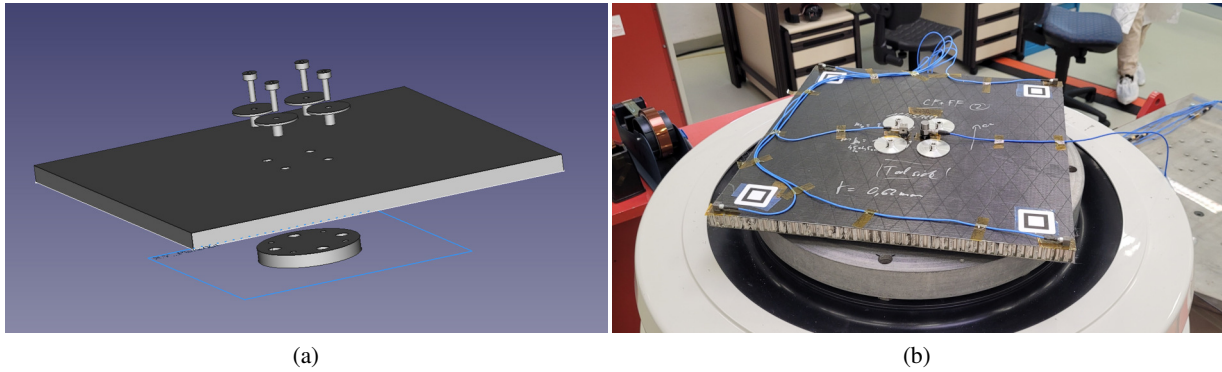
Sandwich panel vibration test (a) exploded view of the sandwich panel assembly Computer-Aided Design (CAD) 3D model, and (b) final testing configuration.
